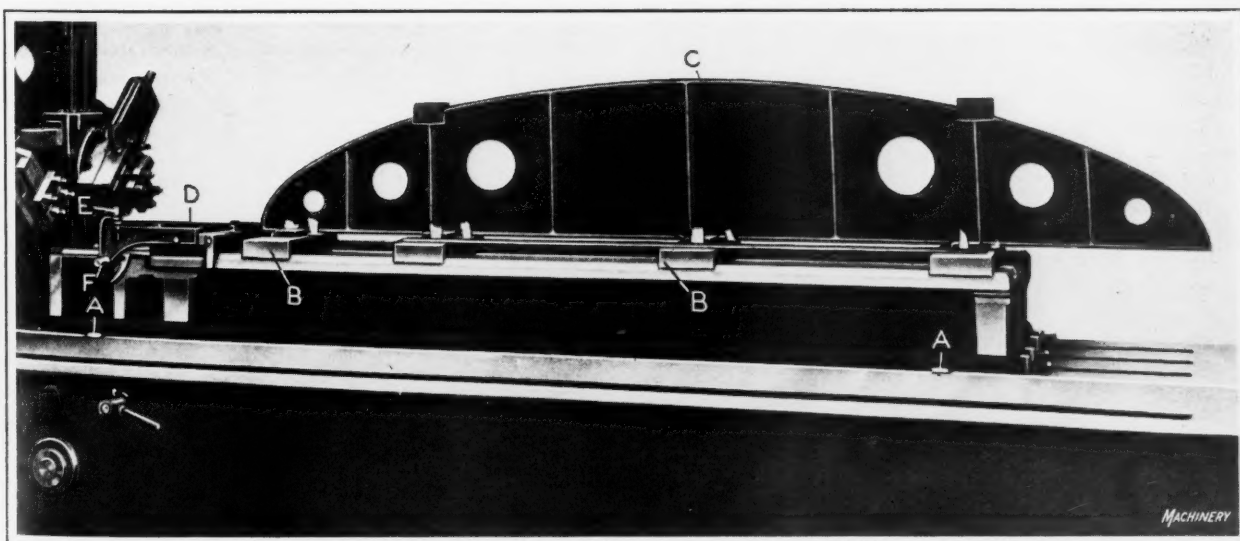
Testing a Lathe Bed for Straightness by Means of Flat-top Blocks and a Six-foot Straightedge
